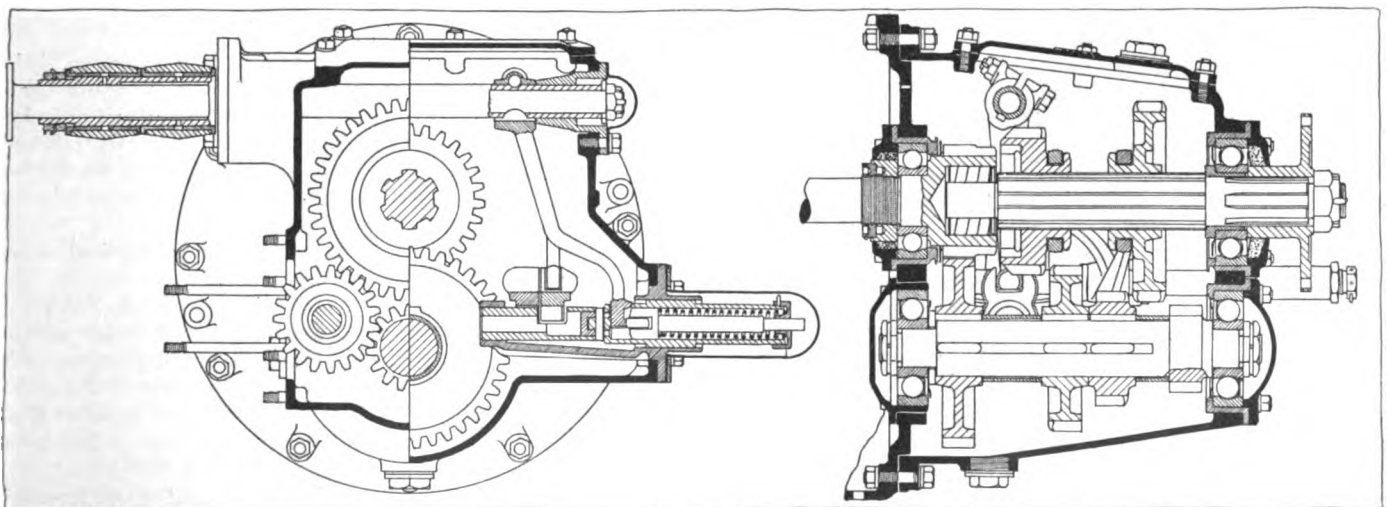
Sections through the gearbox and gearshifting mechanism employed in the Packard twin six
